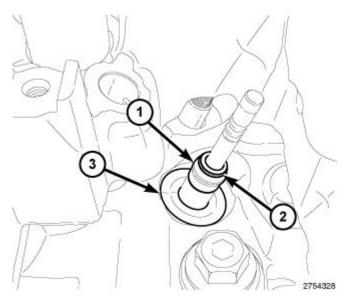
Spring Seat, Valve Guide Seal & Garter Spring Courtesy of CHRYSLER GROUP, LLC
